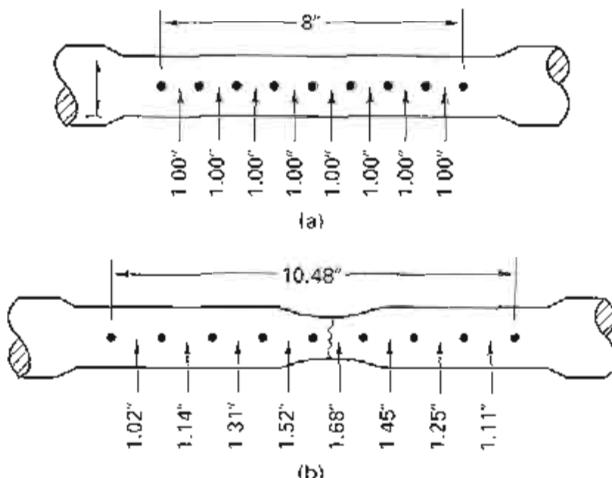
Final elongation in various segments of a tensile test specimen: (a) original geometry; (b) shape after fracture.
